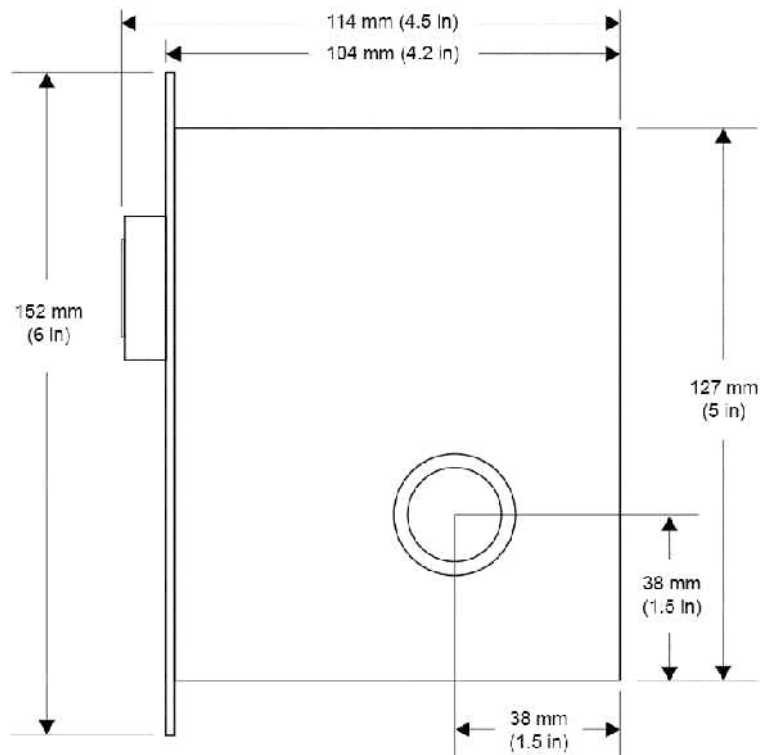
RDP-110C Mounting Dimensions and Knockout Locations (Left Side)
